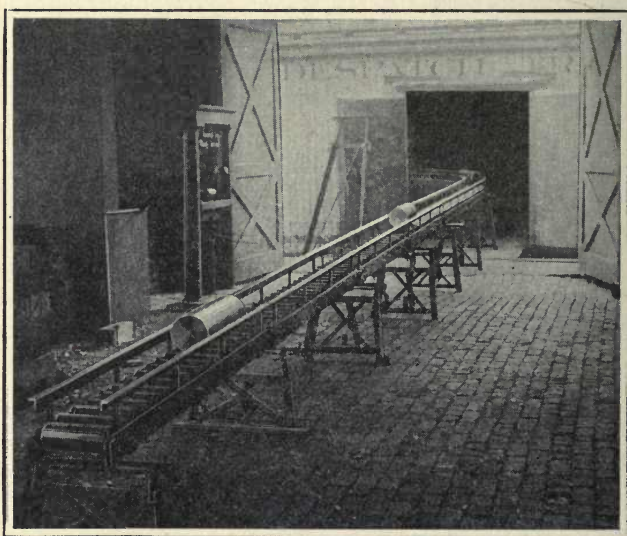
Mathews Gravity Carrier transporting Shell Forgings
